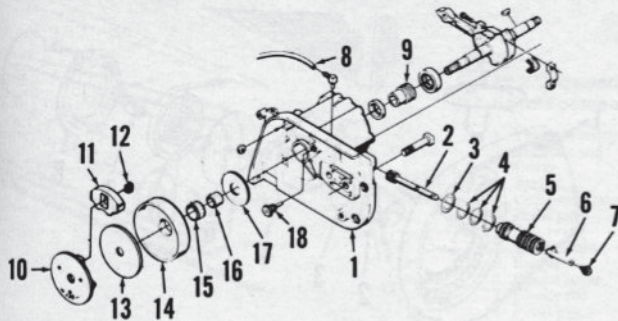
Exploded view of clutch and oil pump assemblies.
